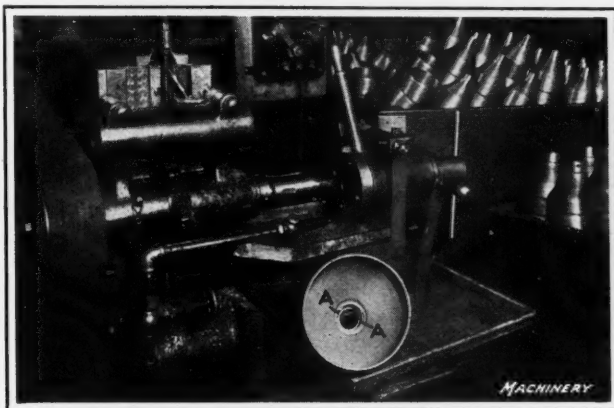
Hand Milling Machine equipped for performing the Preliminary Milling Operation in the Machining of the Milk-slots
